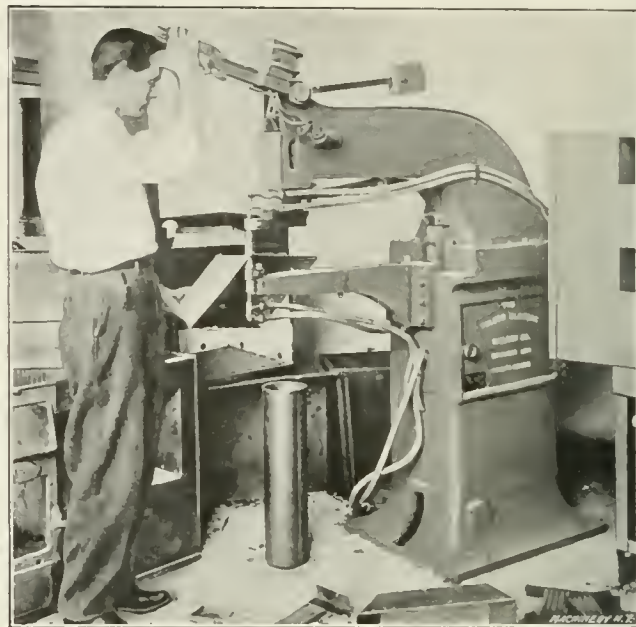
Welder for Stove and Sheet-metal Work
